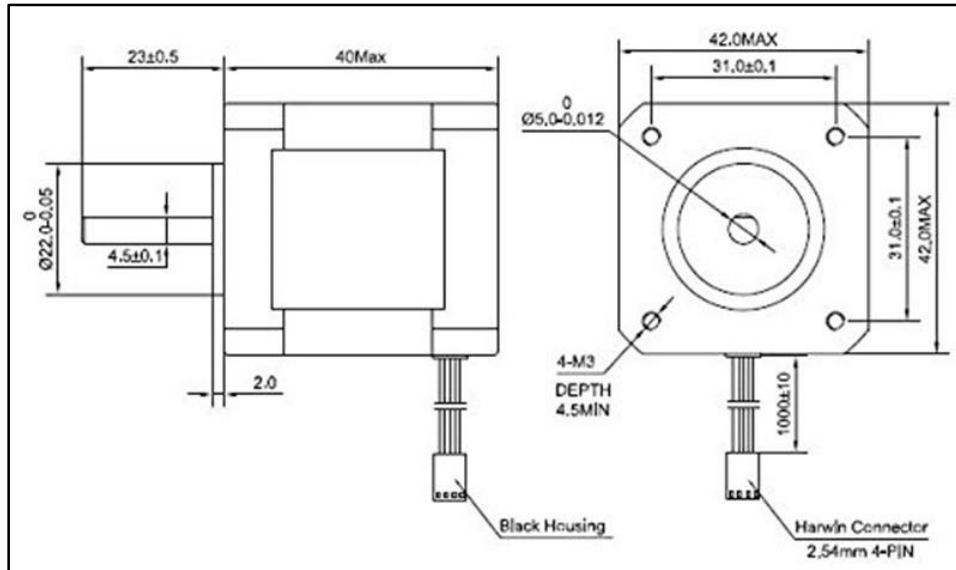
Design dimensions for NEMA 17 motor housing [70]
